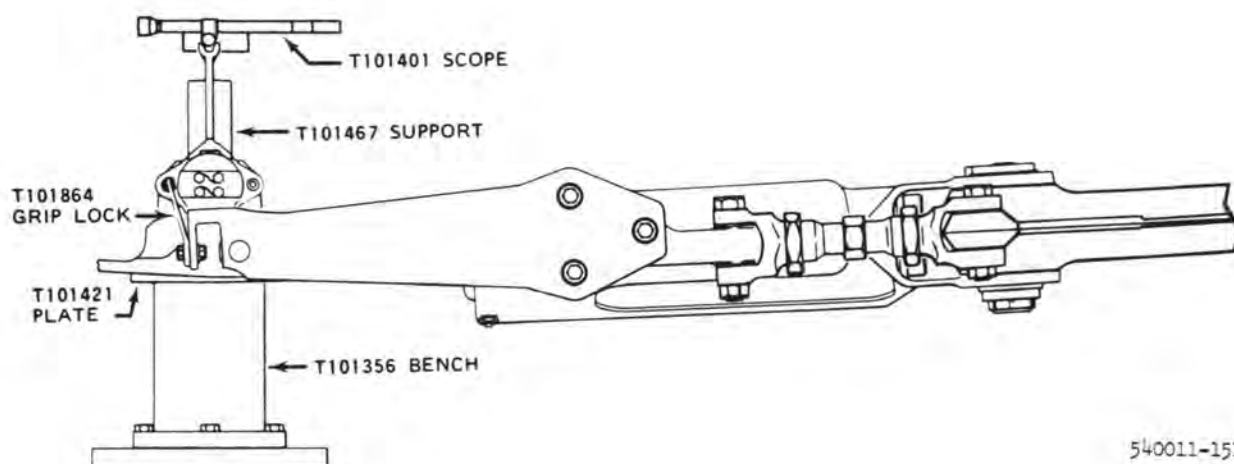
Tool Application — Alignment of Main Rotor Hub and Blade
